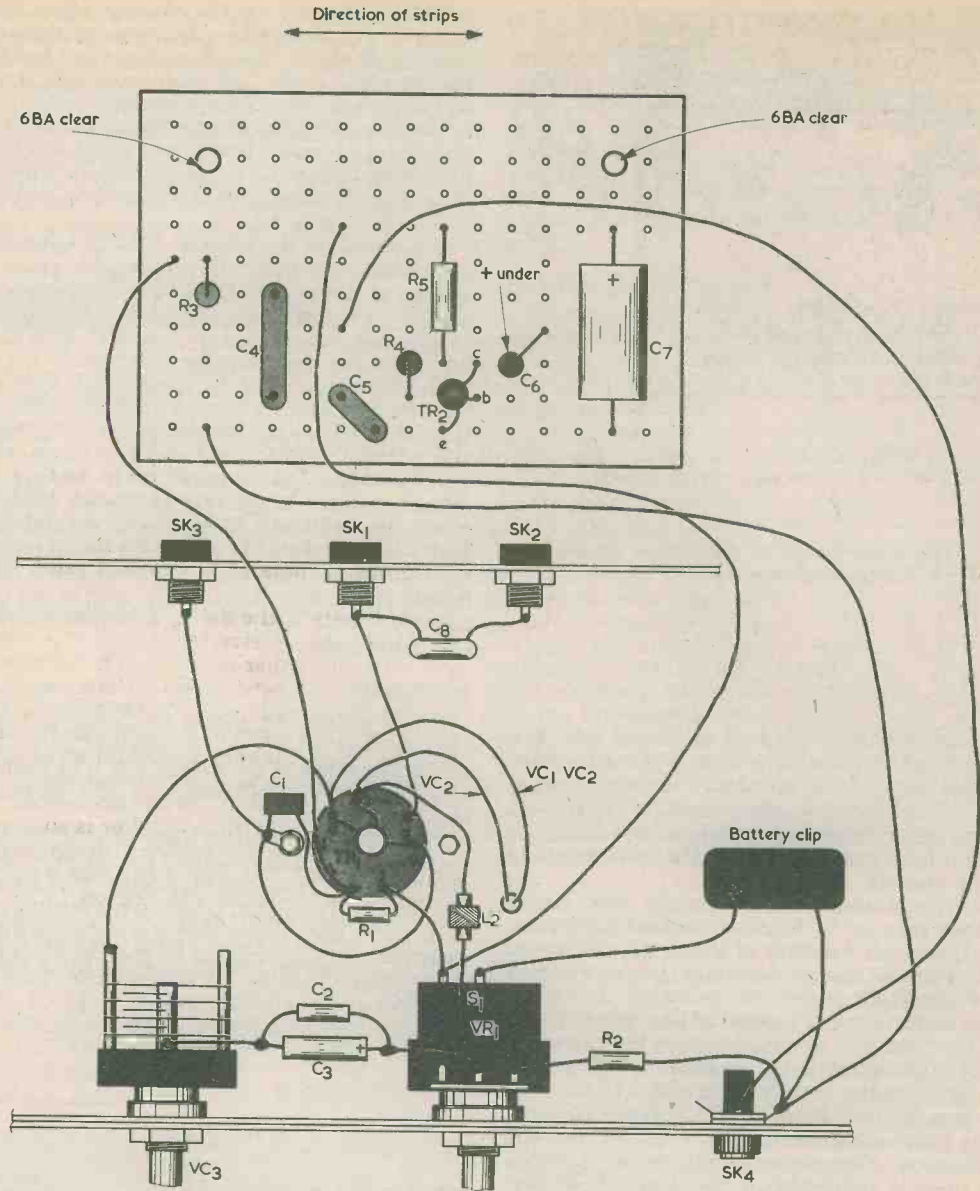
Wiring diagram showing the connections around the B9A valveholder together with the component layout on the a.f. amplifier board
